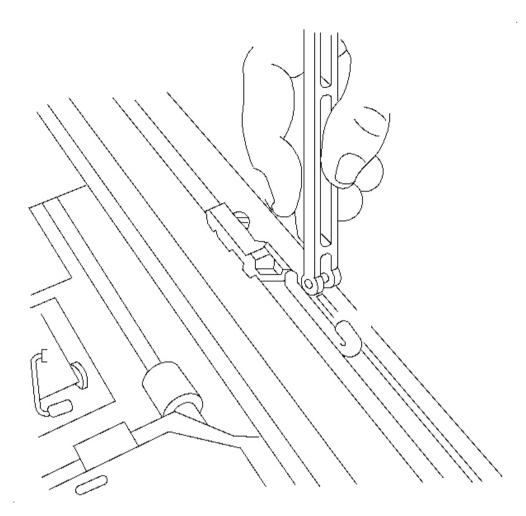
Disengaging Air Deflector From The Hooks On Both Sides of Sunroof Courtesy of GENERAL MOTORS CORP.
